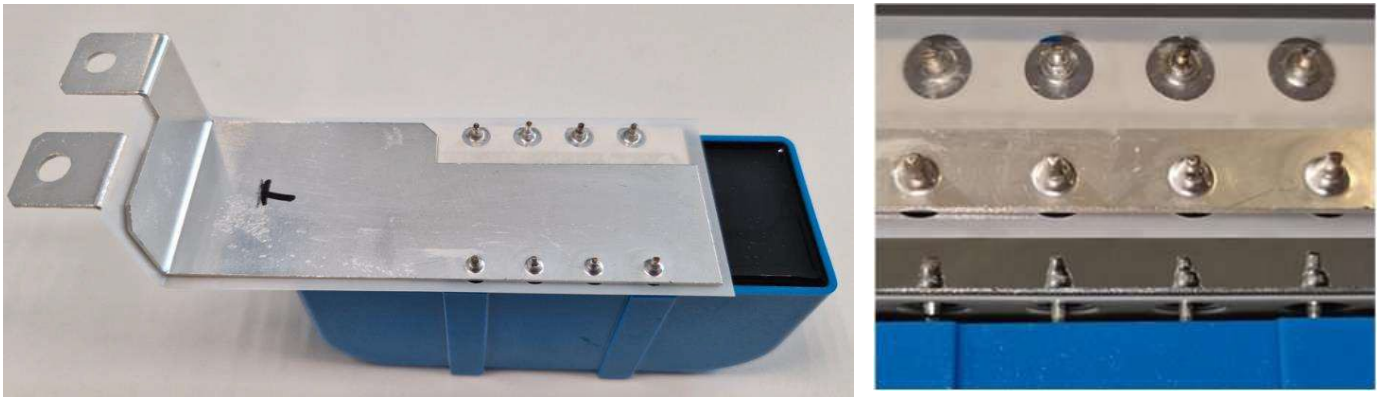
xEVCap with TDK's busbar design. After laboratory trials of the soldering process. Detail of terminals and finishes
